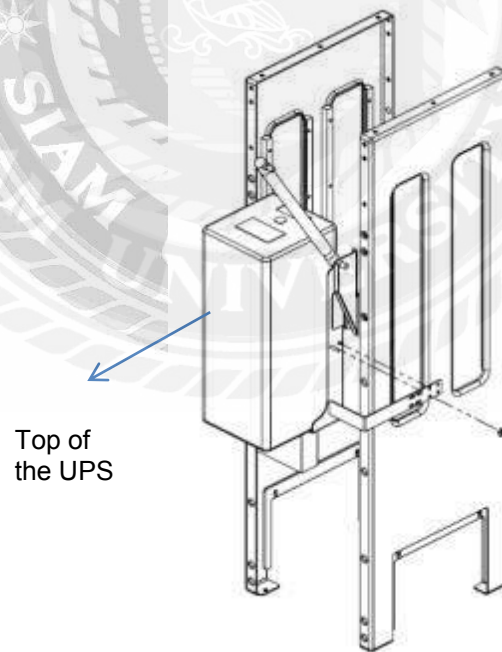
Location of UPS to be Slotted on the Mounting Bracket
